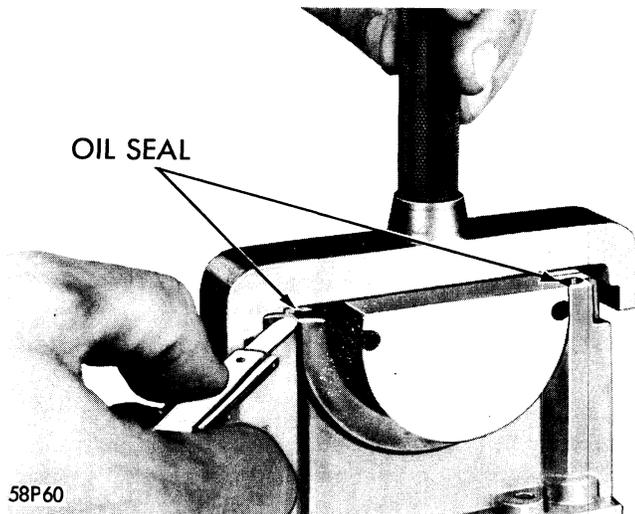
Trimming Rear Main Bearing Oil Seal—350 Cubic Inch V-8 Engine
